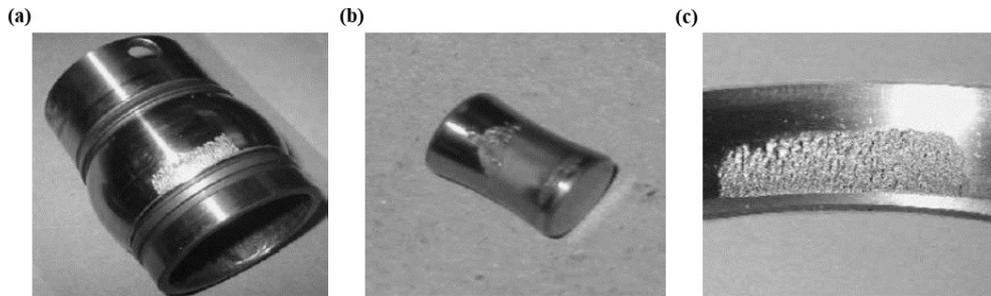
(a) Inner race failure in bearing3; (b) roller element failure in bearing4; (c) outer race failure in bearing1 (see [24])
